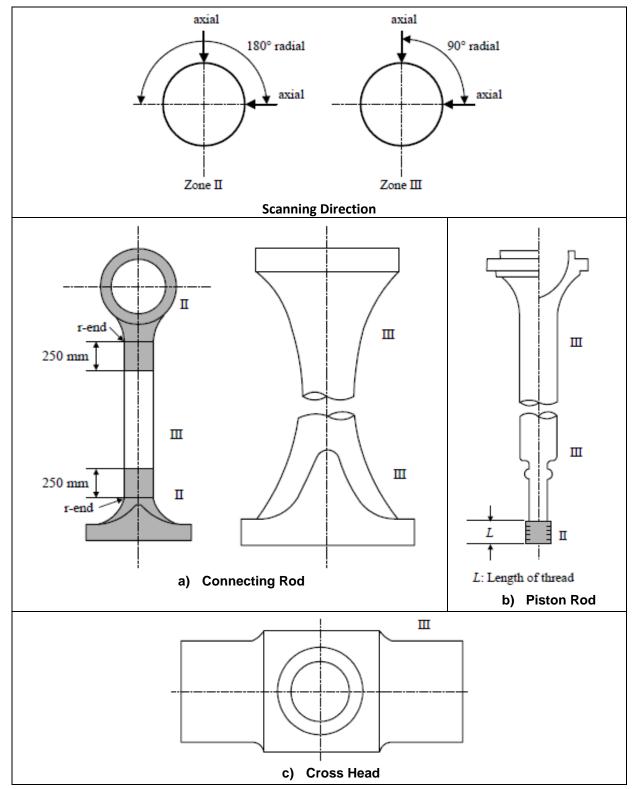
Zones for Ultrasonic Testing on Machinery Components
